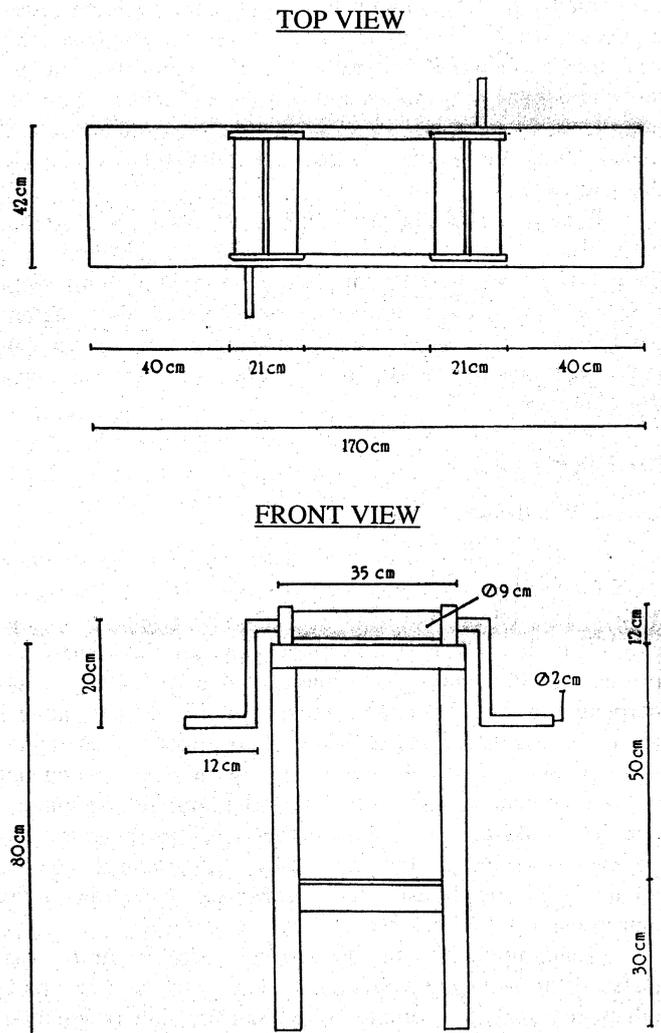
b. The Type of Machine Which is Used Currently (Top View and Front View)
